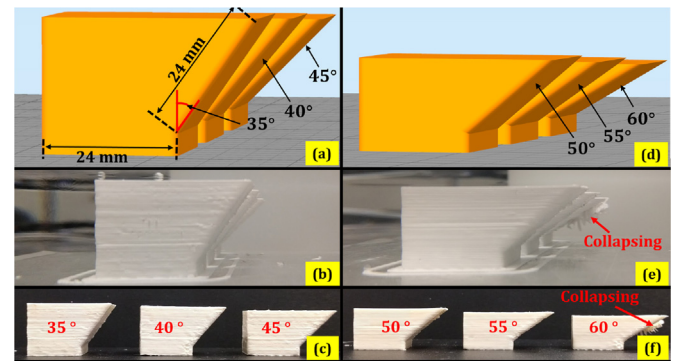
Wedge-shaped test parts: (a) and (d) CAD models, (b) and (e) as-printed parts surrounded by oil, (c) and (f) as-sintered parts.
